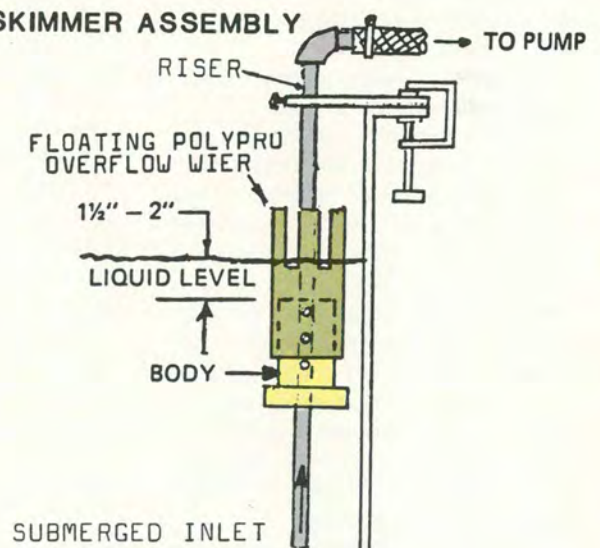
Floating skimmer and suction pipe assembly for filtering cleaner solutions
